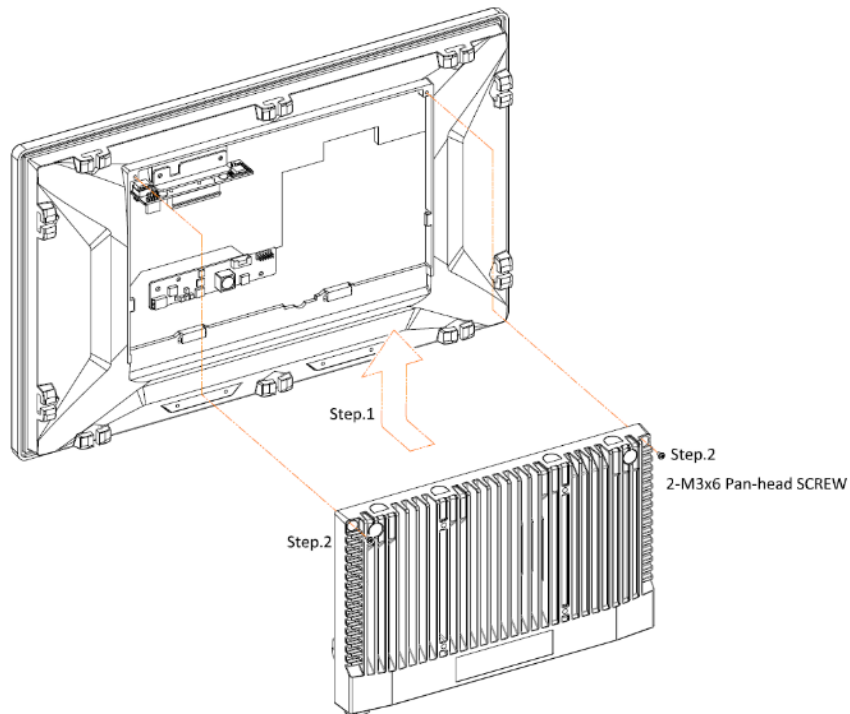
AUHMI-816B/821B MB Box kit attaches to Front Kit
